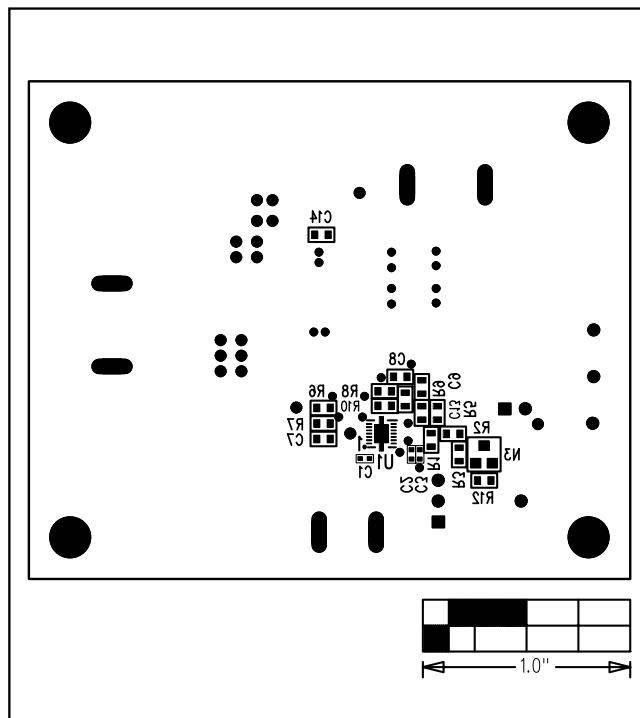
MAX17024 EV Kit PCB Layout—Solder Side
